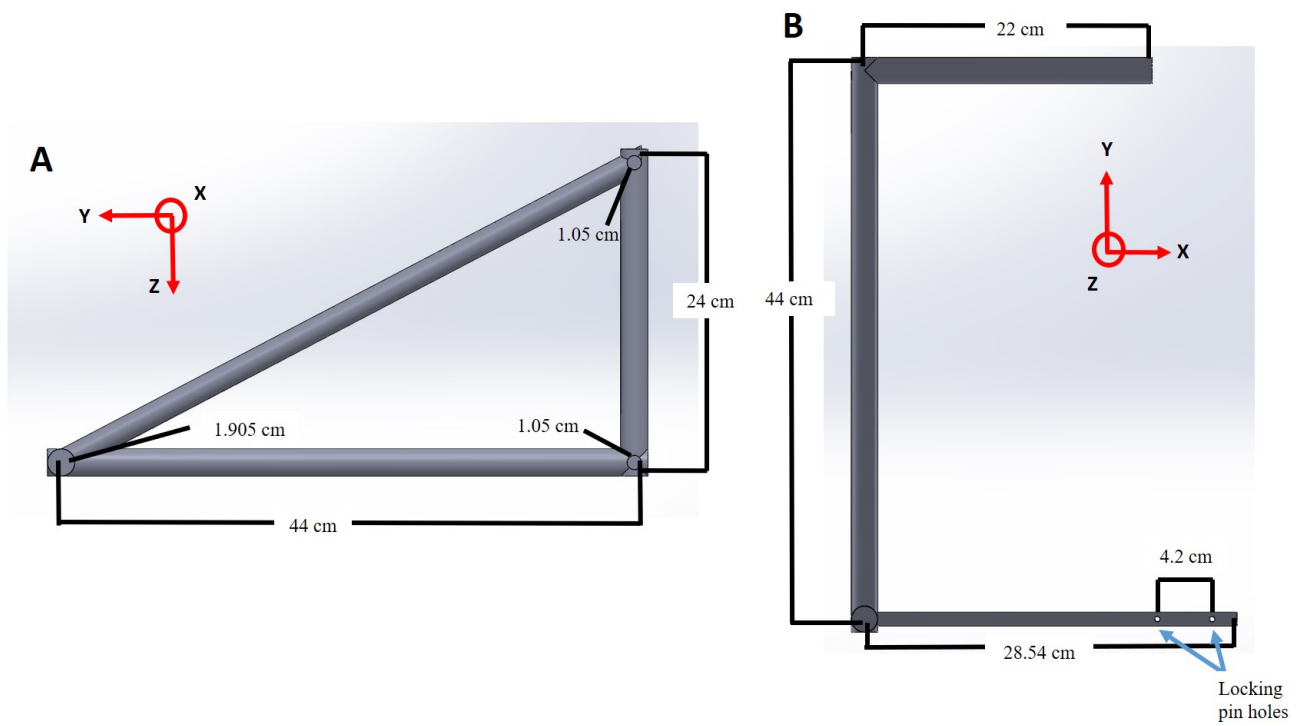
SOLIDWORKS CAD of the main structure of the instrument mount with main dimensions A) side view and B) top view
